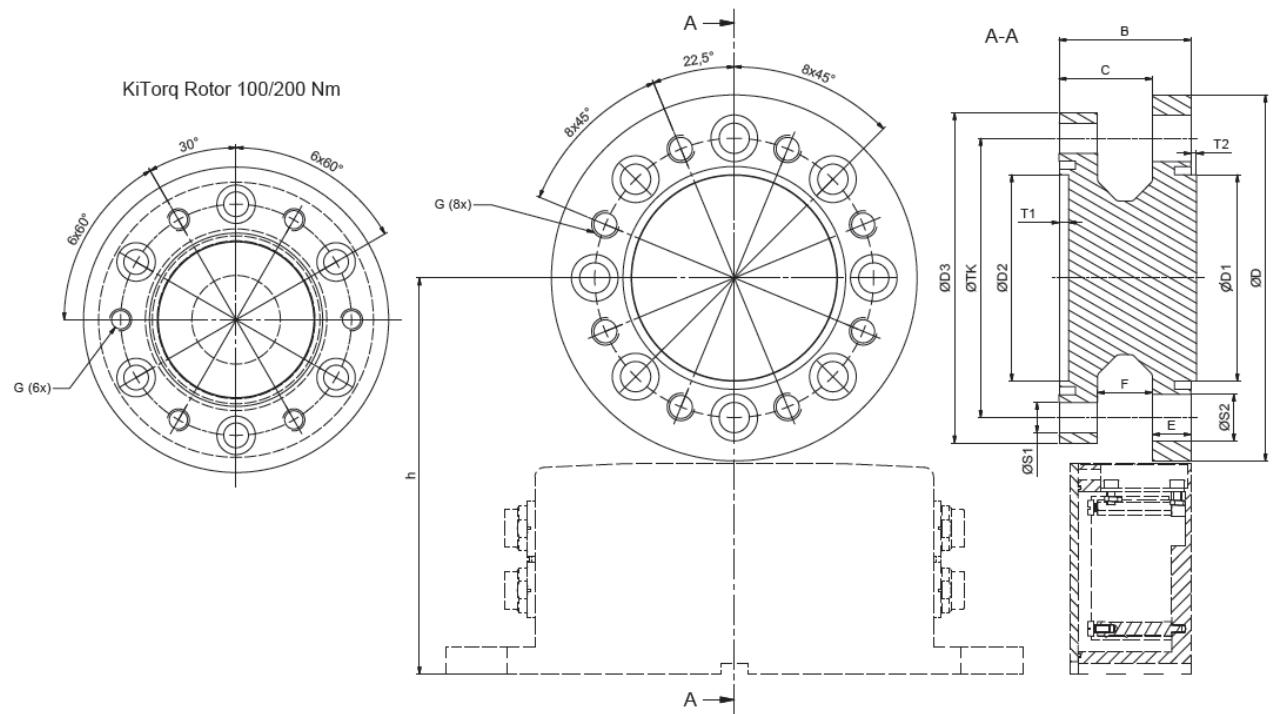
Dimensional drawing of Type 4550A... KiTorq Rotor torque measuring unit
